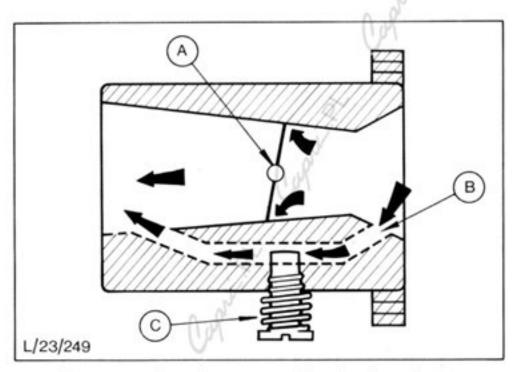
Throttle plate assembly showing by-pass idle speed adjustment.
